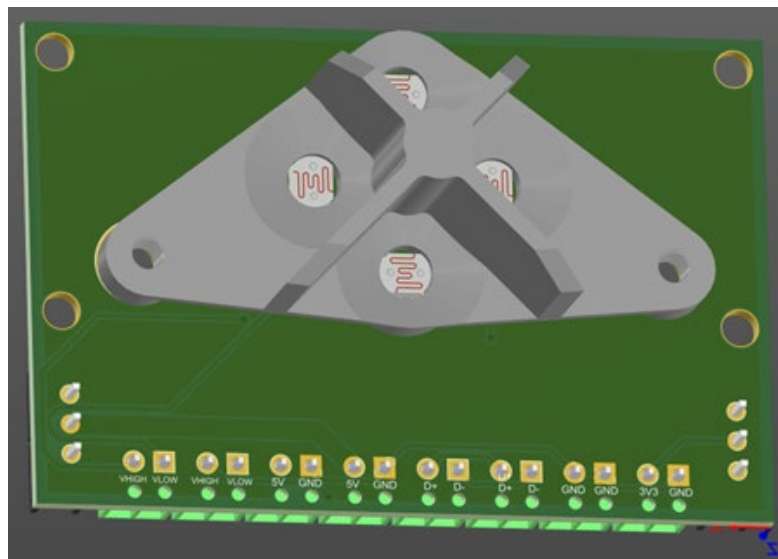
3D printed object on top of photoresistors (Light Sensor PCB 3D view)
